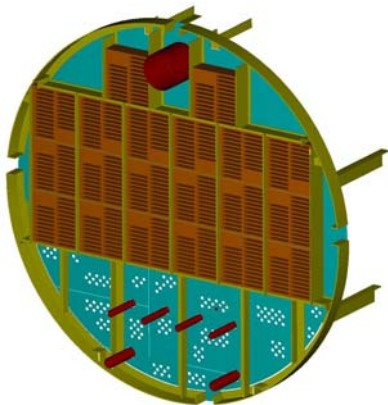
VIEC elements with supporting frame installation, perforated plates above and below
